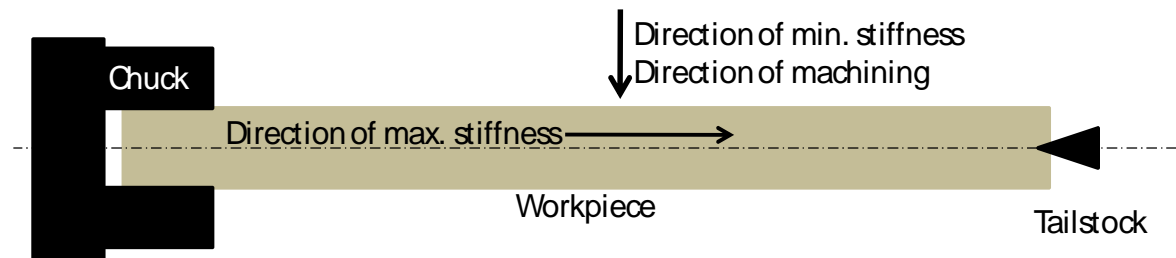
Illustration of the directions of minimum and maximum stiffness and machining direction in a generic long and slender workpiece.
